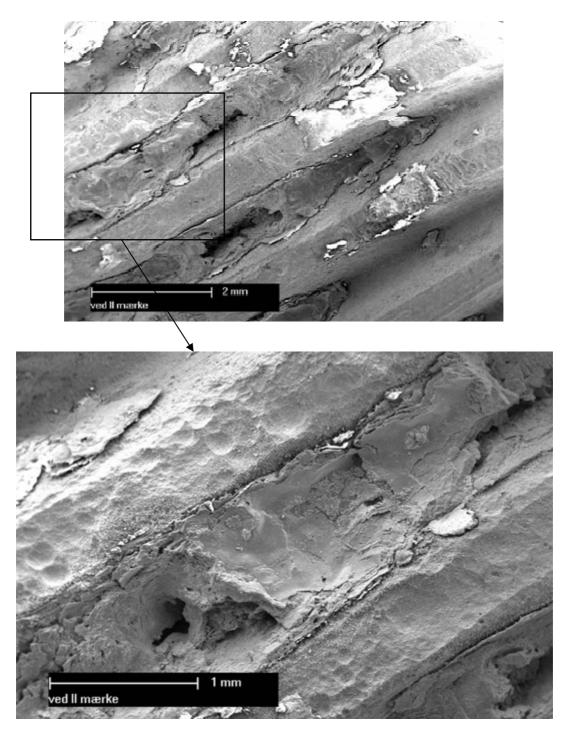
Scanning electron microscope images of non-engaged threads. Note the corrosion attacks in the thread tops.
